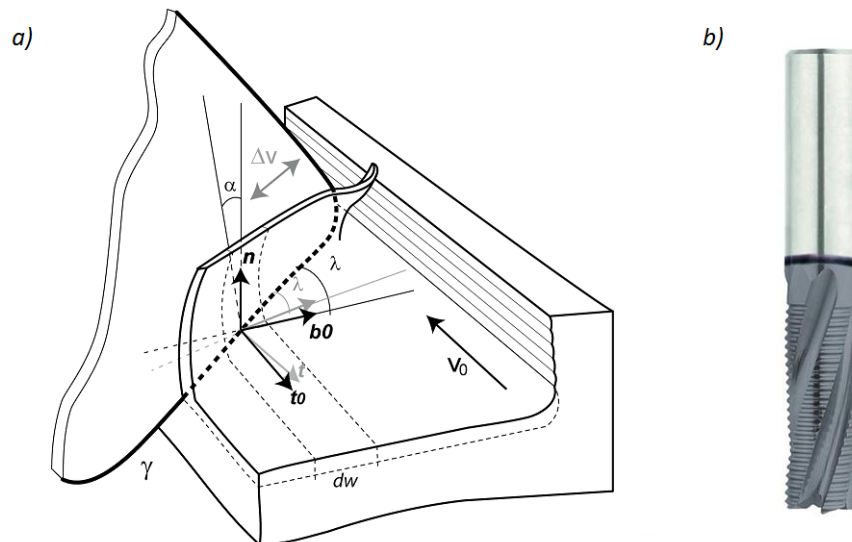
a) Local force basis on the cutting edge element, b) serrated milling tool
